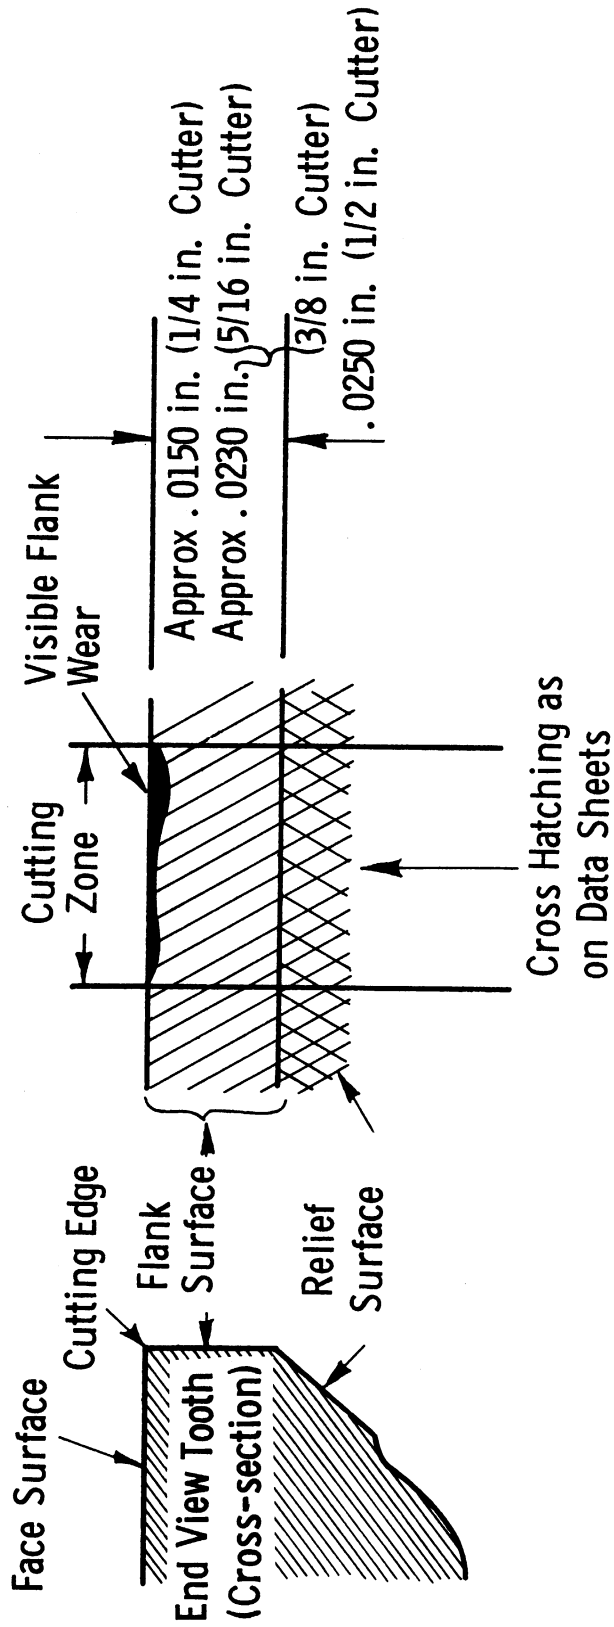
Sketch of typical wear of 4-fluted tungsten carbide milling cutter.
